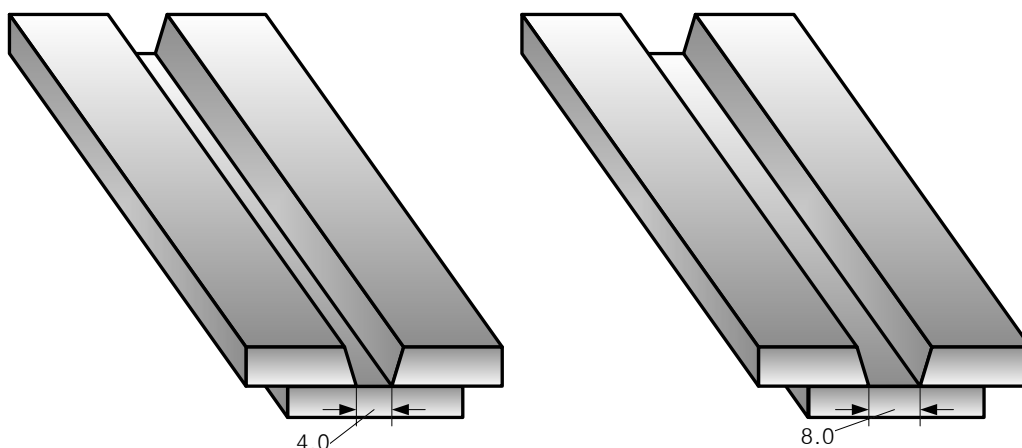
Workpiece for butt touch sensing and arc sensing
